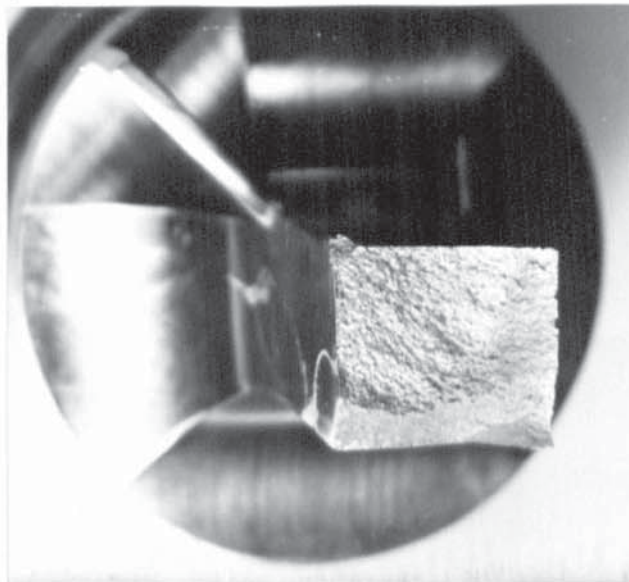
Failure of Short Corner-Crack Specimen.
